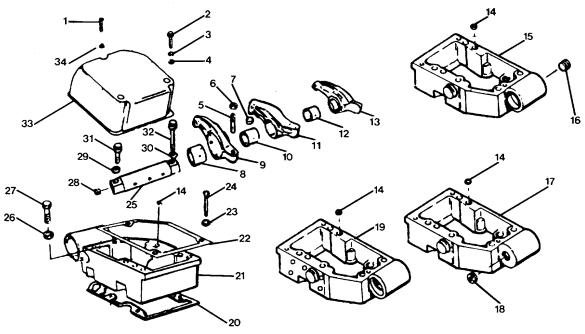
Rocker Lever Housing Group/Rocker Housing Cover.
